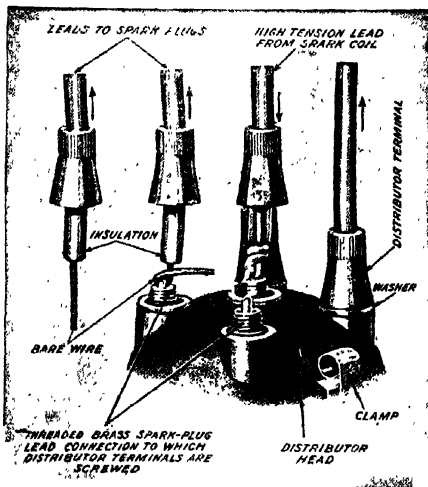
Showing Method of Connecting High-tension Leads to Distributor Cap of Igniter.
